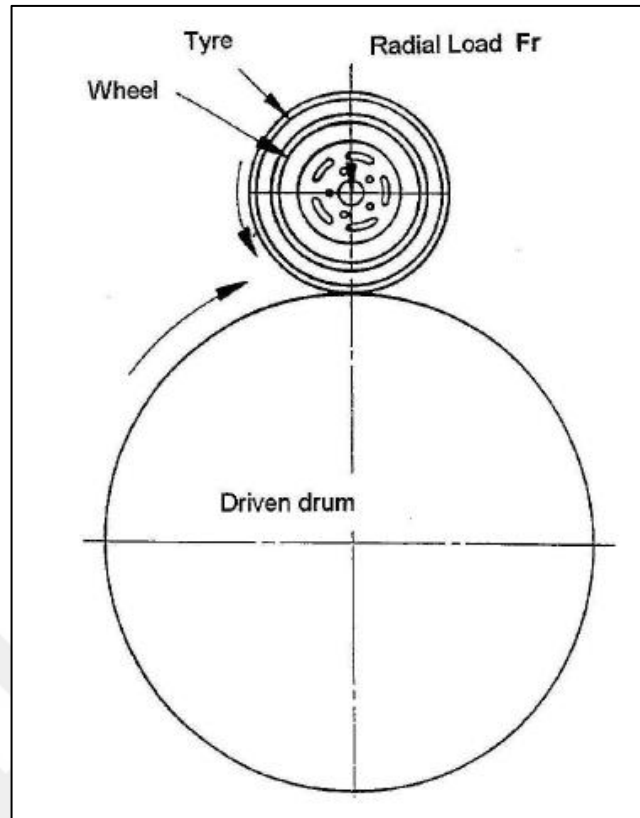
Radial fatigue test machine schematic drawing (Association of European Wheel Manufacturers, 2006)
